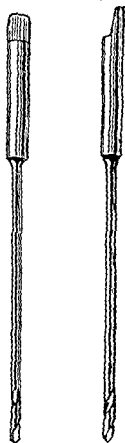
Drills. The cutting part is preferably short, as shown here, to avoid making tapered drill holes.
